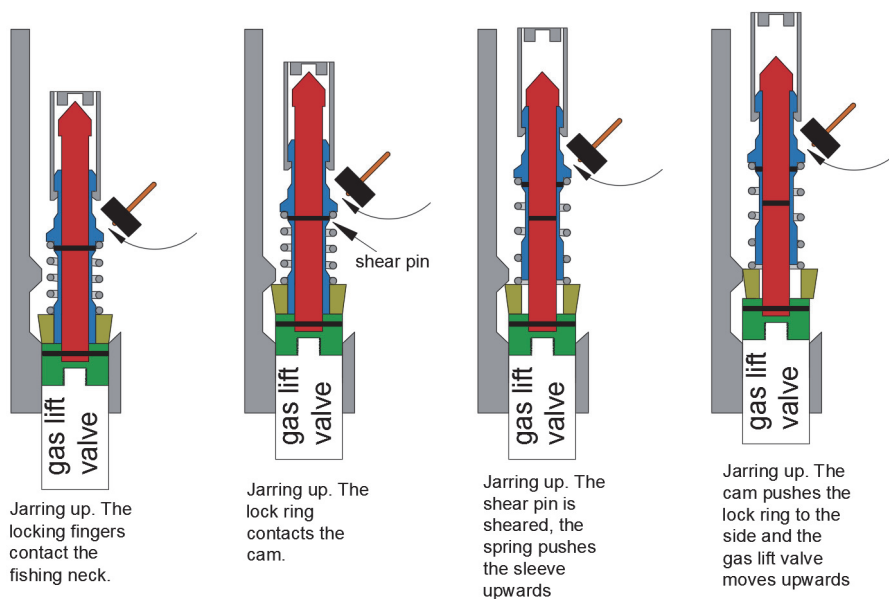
SEQUENCE TO RETRIEVE A GAS-LIFT VALVE FROM THE MANDREL POCKET
